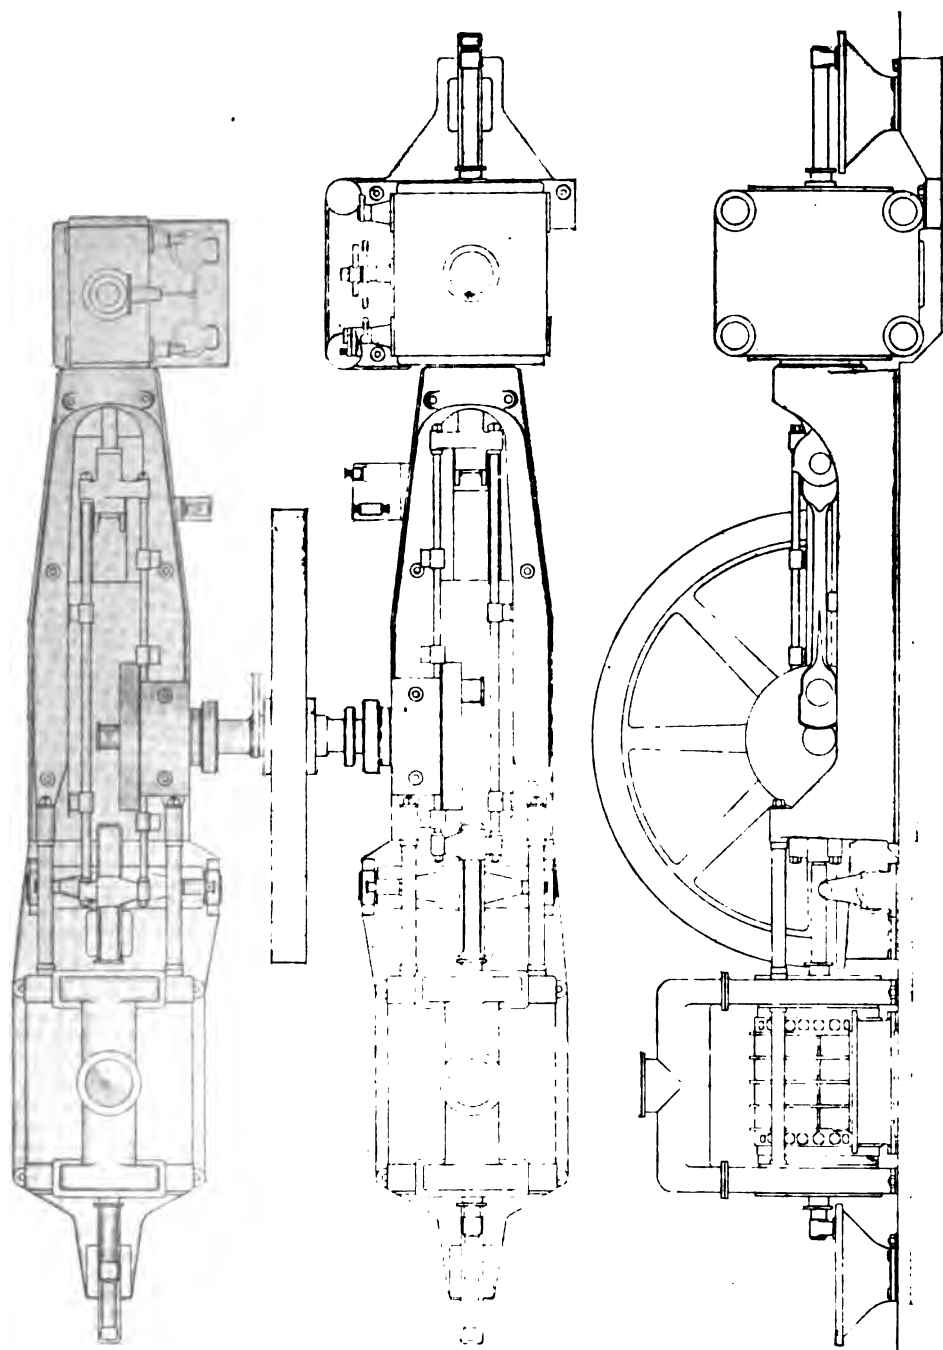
Inside-crank blowing engine. Slick air cylinders 36 in. and 72 in. x 54 in. steam, 72 in. and 72 in. x 54 in. air. Allis-Chalmers Company.
